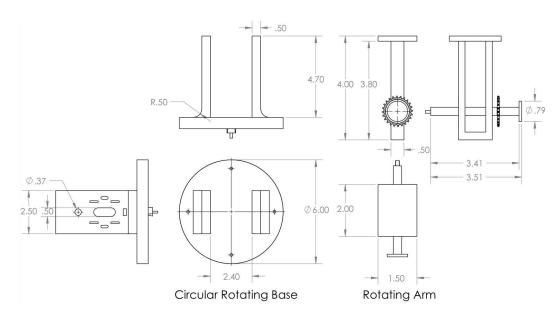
Mechanical drawing of the collector components. All measurements are in inches.
